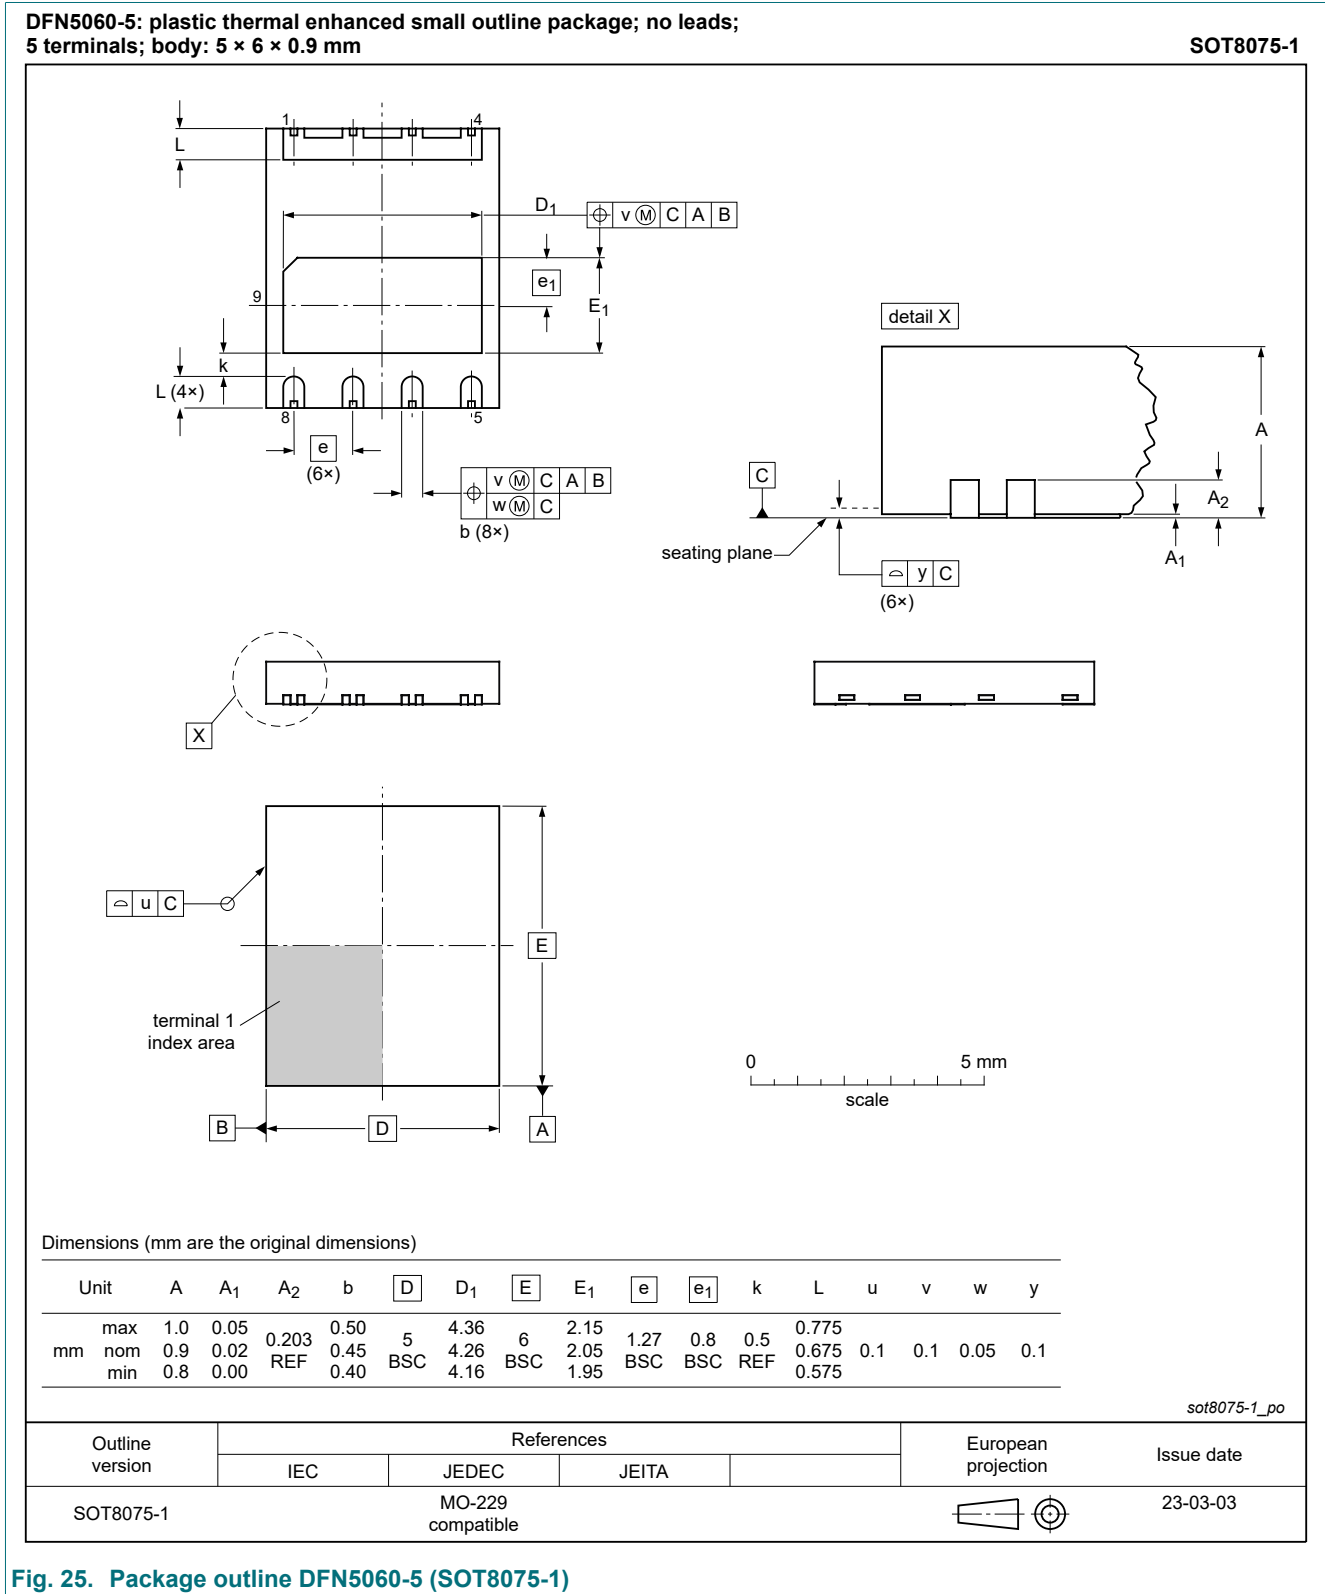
Package outline DFN5060-5 (SOT8075-1)
